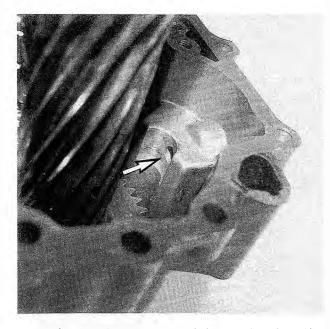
Area of rear transmission case (arrow) requiring gasket sealer.
